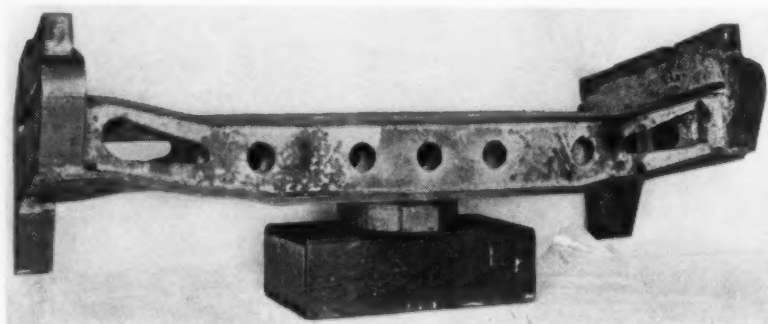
BOLSTER DISTORTED AFTER FINAL TEST
